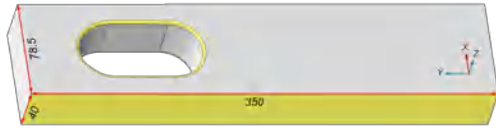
Scaled central holed thick plate (all dimensions are in mm).
